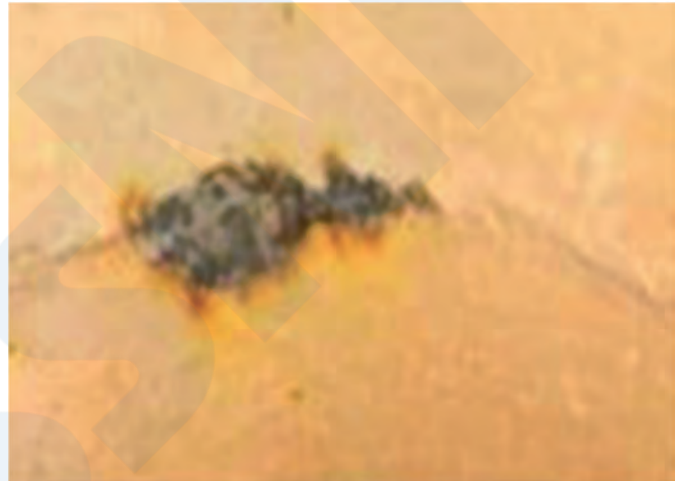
Paint peeling at butt-welded parts of distance piece of discharge water system
